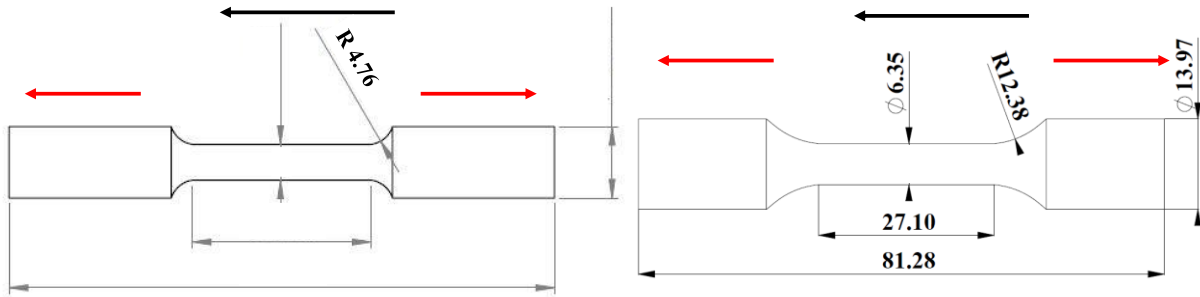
Geometries of the (a) tensile and (b) fatigue specimens used in this study (dimensions are in mm).
